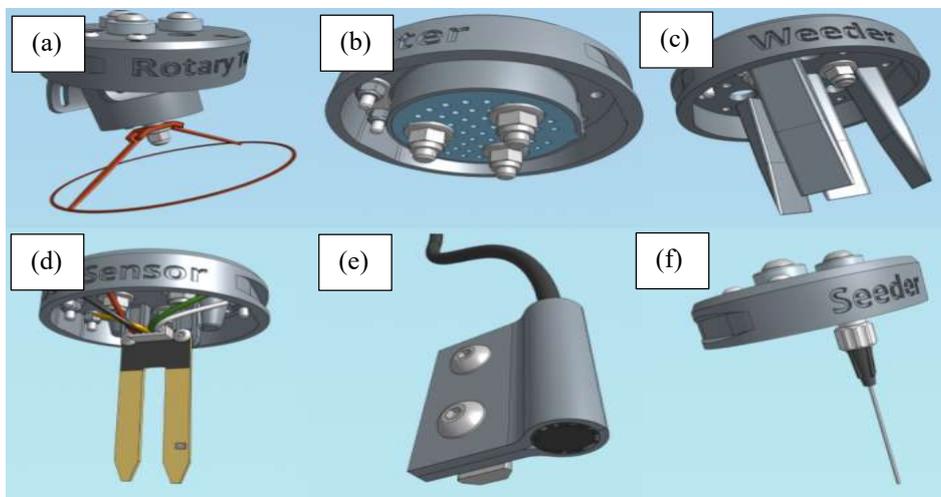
Auxiliary tools FARMBOT: Rotative Tool (a); Irrigation Nozzle (b); Weeding Claw (c); Soil Sensor (d); Camera (e); Injector Nozzle (f) (adapted from Farmbot, 2021).
